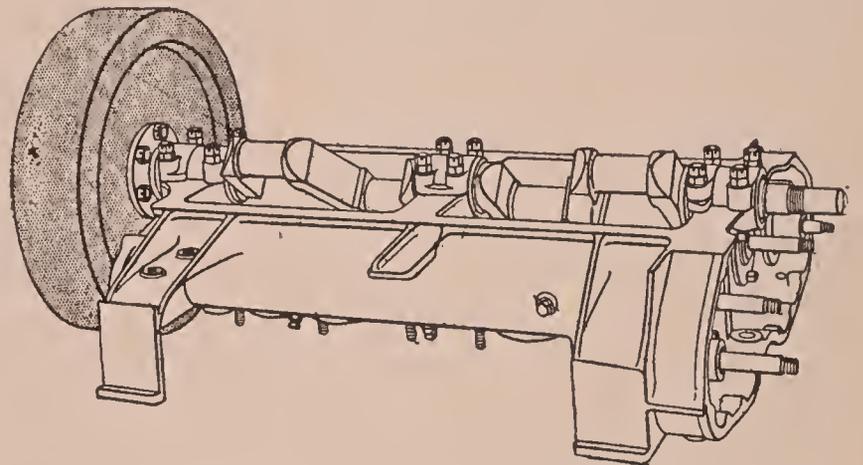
Appearance of the underside of the engine crankcase with the oil can removed and the gears taken out.
